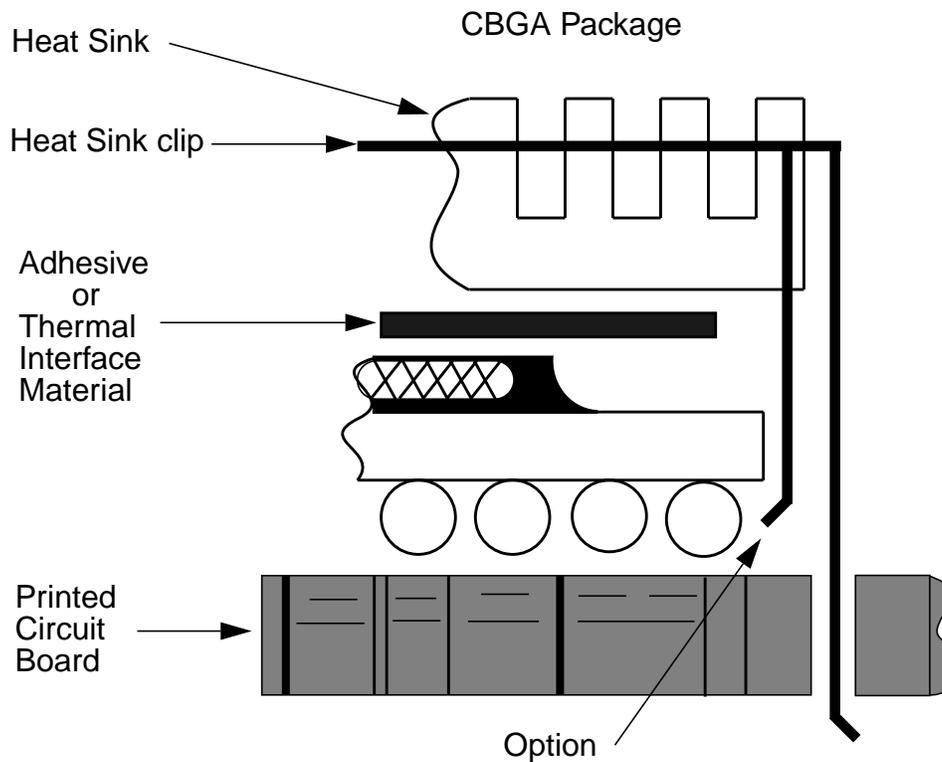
Package Exploded Cross-Sectional View with Several Heat Sink Options
